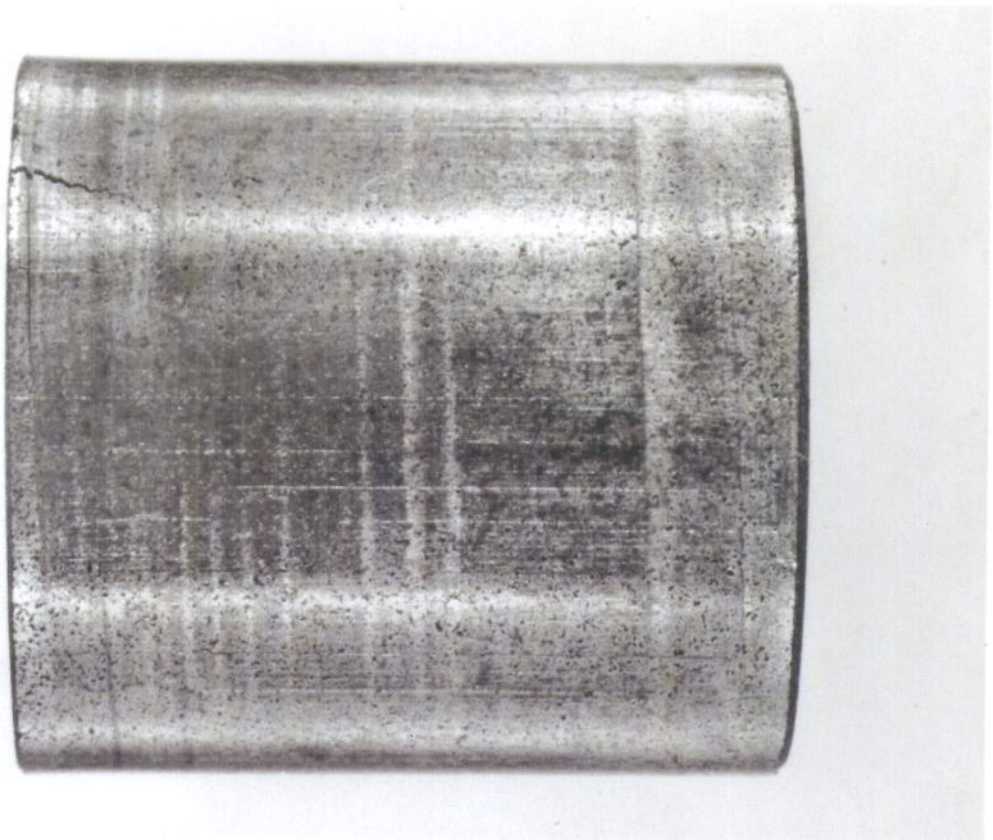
Double fatigue failure of the bolt.
